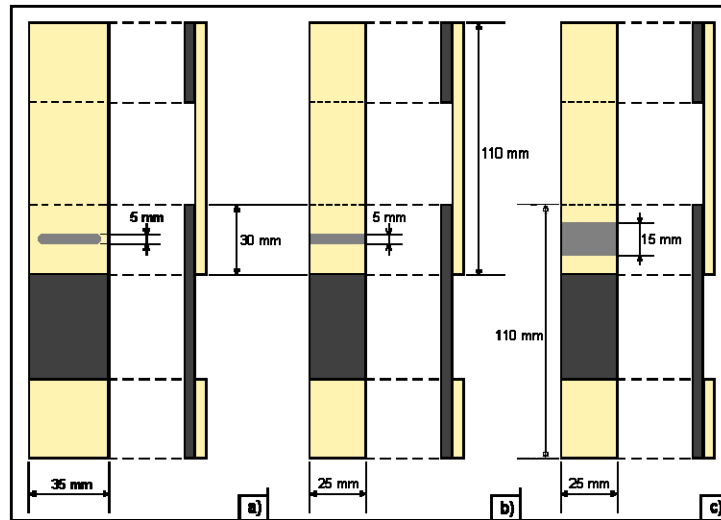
drawing of the shear test specimens. 3.a) test specimens with beginning and end of weld seam. 3.b) standard test specimens. 3.c) test specimens with a large weld seam.
